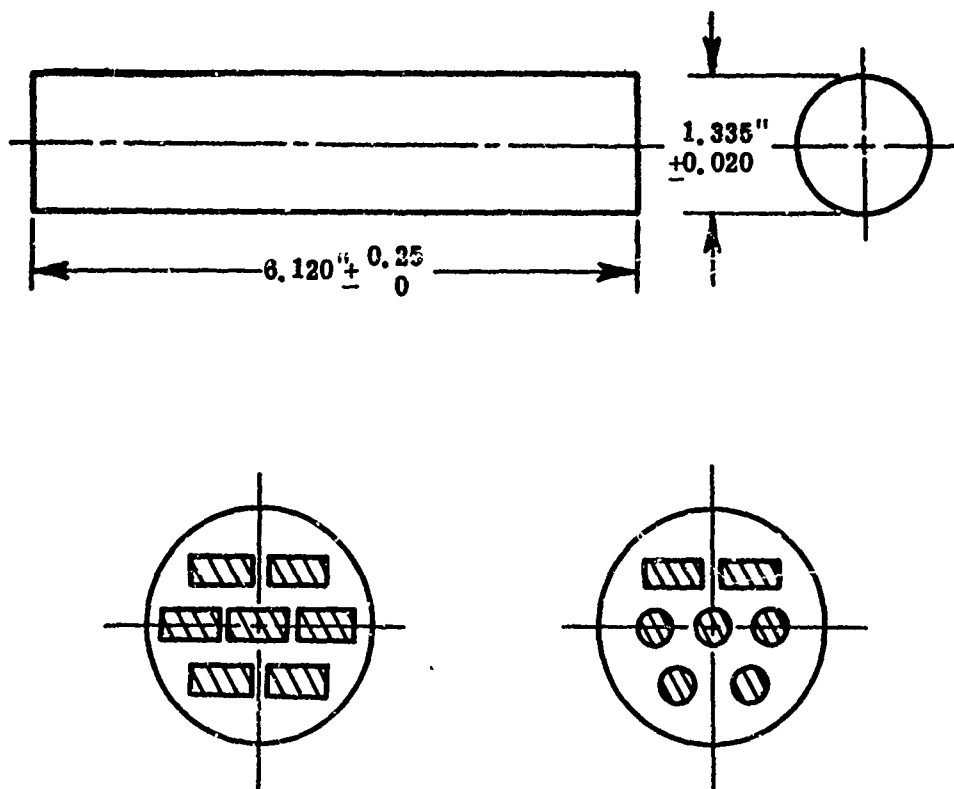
Configuration of Specimen Blank 1831-A-13 as received from Coors and Cutting Plan for Removing Phase Macro Tensile and Macro Flexural Specimens
